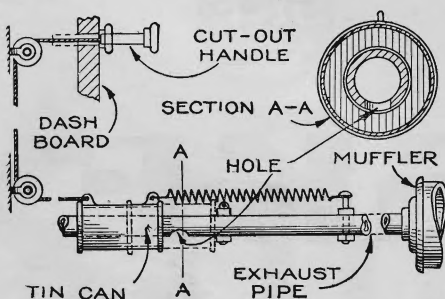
How to make an effective motor cut-out, using an old tin can and other discarded parts.
